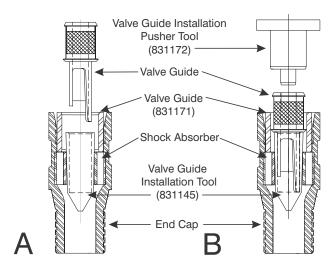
Place End Cap, Valve Guide and Installation Tools in the Arbor Press.
